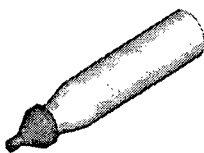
3-Dimensional shape of diamond wheel (Slanted tool axis grinding, Parallel grinding)
